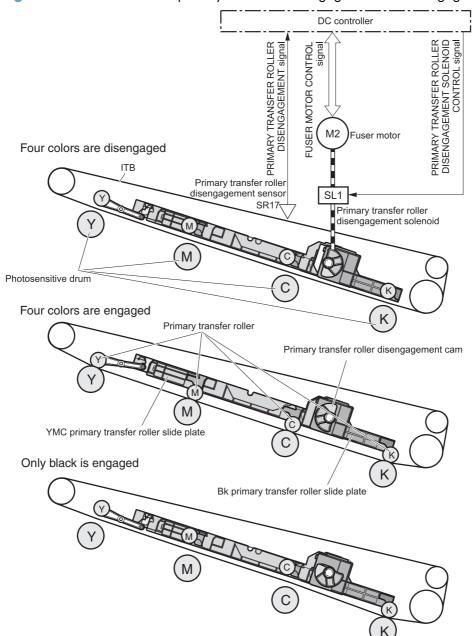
Three states of primary-transfer-roller engagement and disengagement
